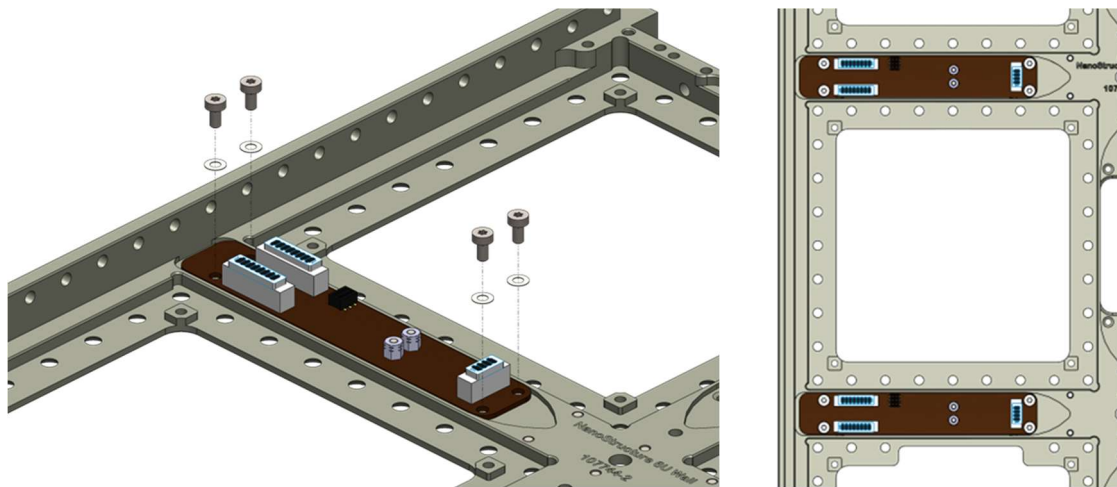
Mounting of a Release controller PCB on a GomSpace 6U structure.
